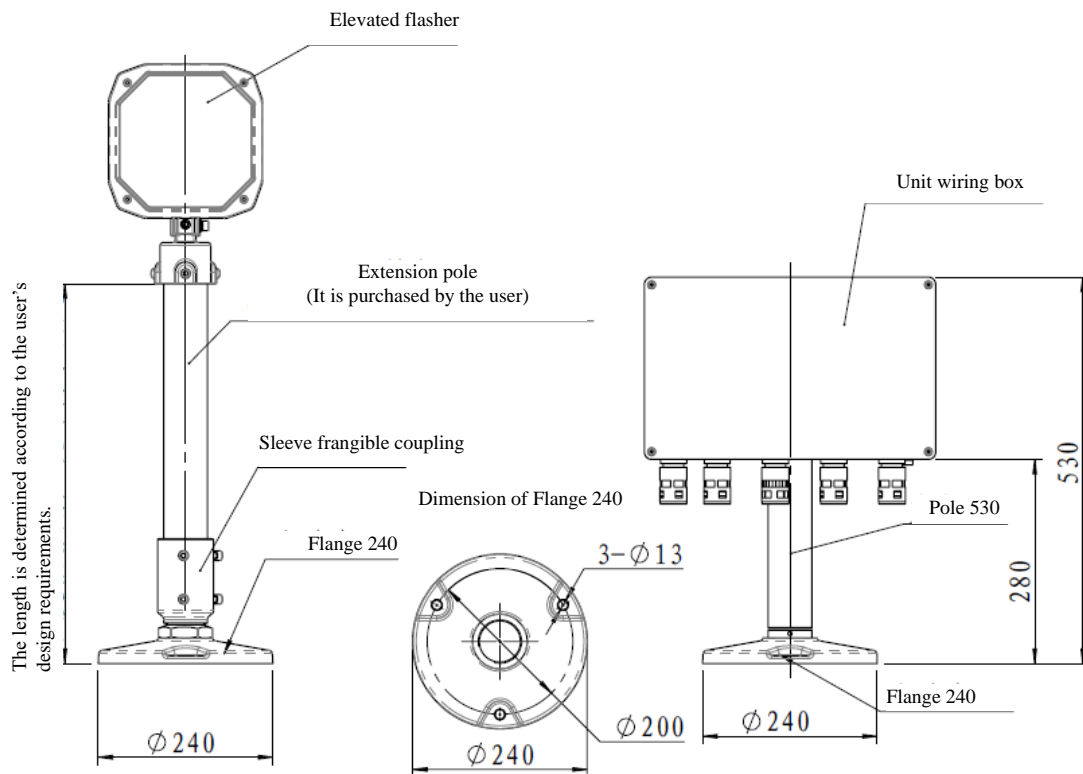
Separate Installation Diagram of Unit Wiring Box and Lighting Fixtures
